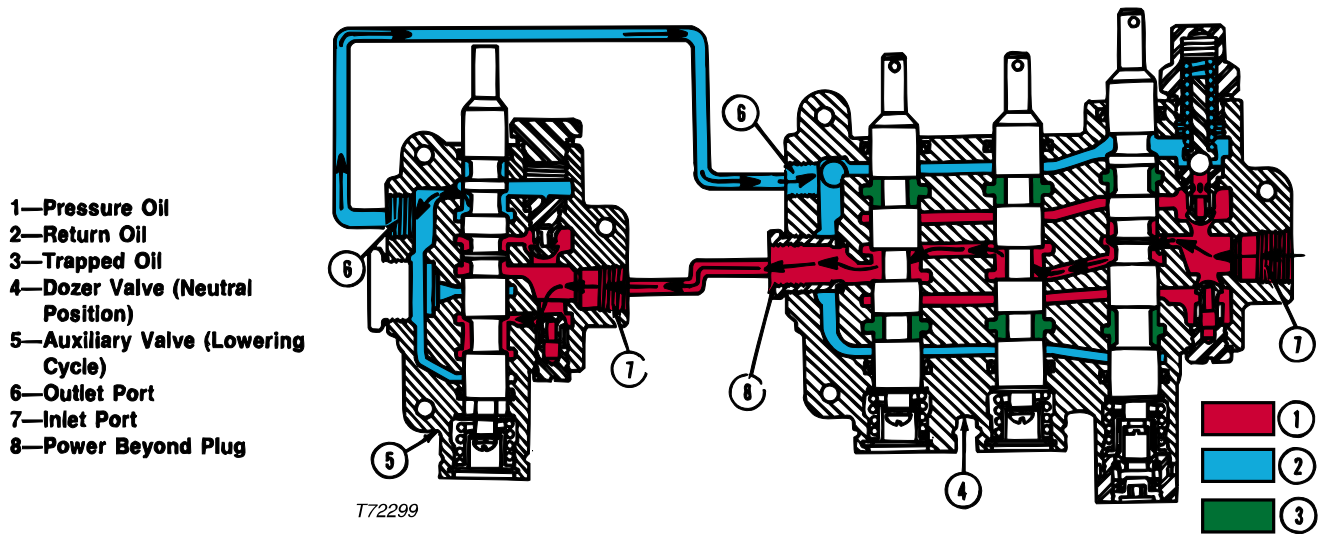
Three-Spool Control Valve with Auxiliary Valve
